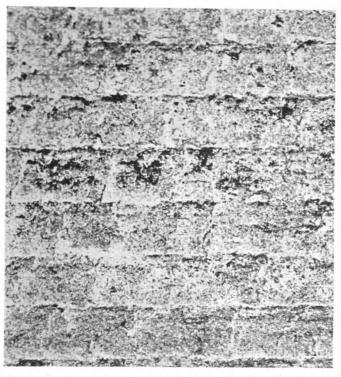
Greatly enlarged view of the bore of a tire that failed because of rough machine finish
